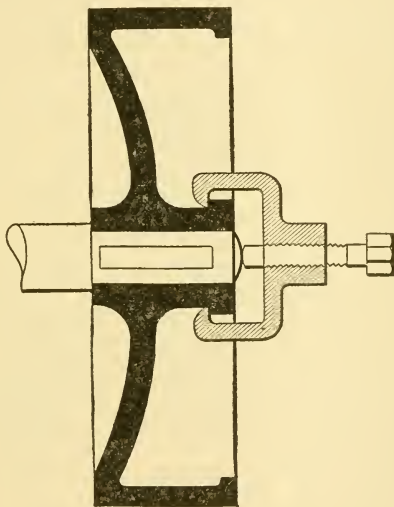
Method of withdrawing fly wheel from crank shaft and the tool used for the purpose.
